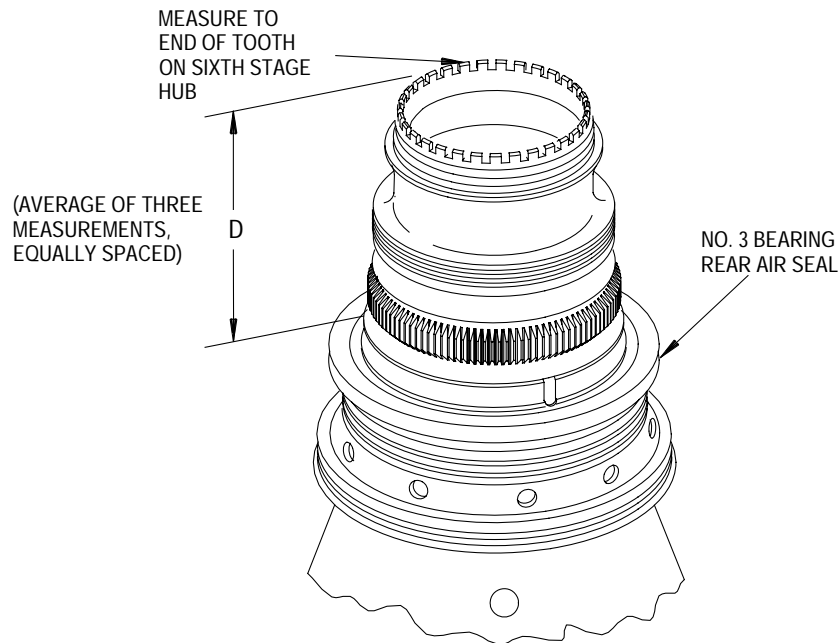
No. 3 Bearing Rear Air Seal - Installation (Sheet 1 of 2)
